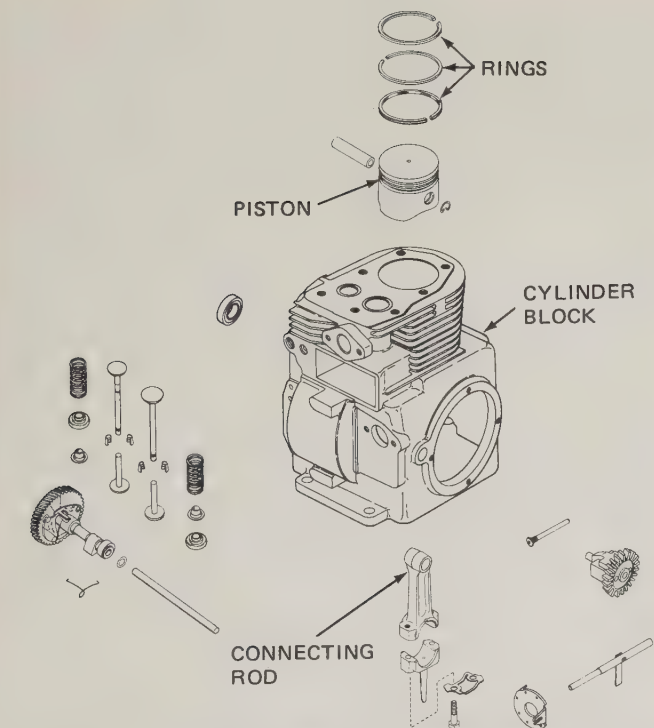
Miniblock assembly for a small engine. (Kohler Company)
